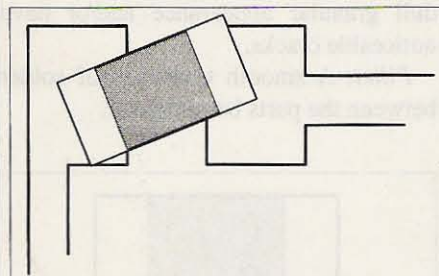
Although the SMD terminals may be resoldered to the pads, the wetting is insufficient and the SMD should be repositioned.
